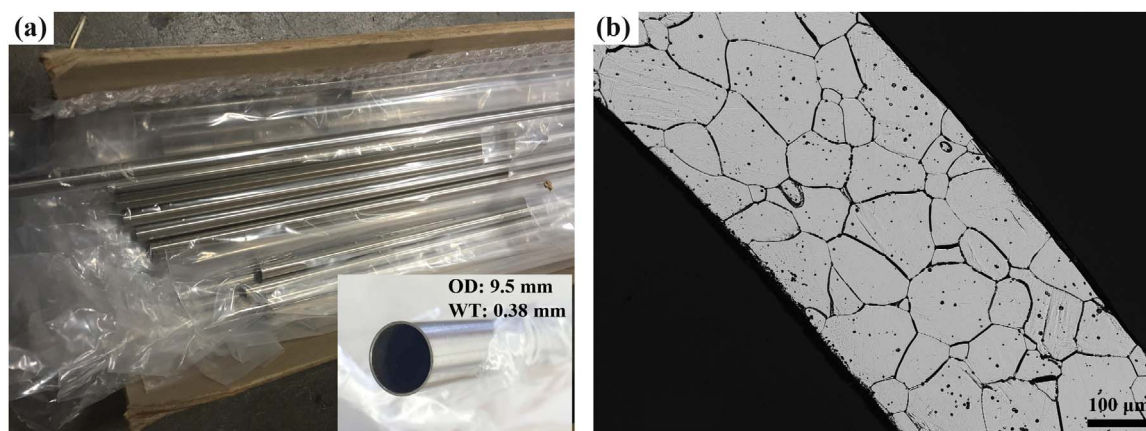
(a) FeCrAl tube fabricated by tube drawing; (b) cross-section optical micrograph of a FeCrAl tube.
